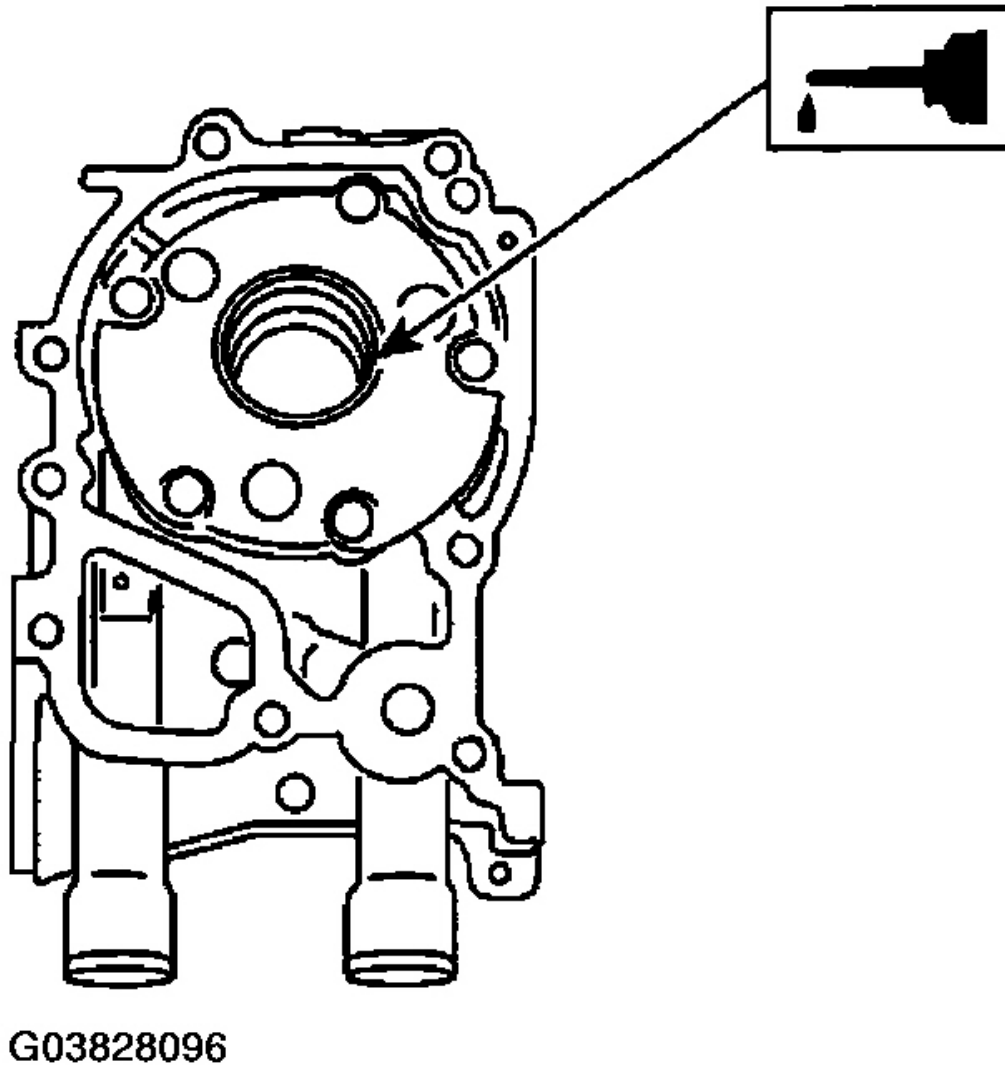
Applying Coat Of Engine Oil To Inside Of Oil Seal
